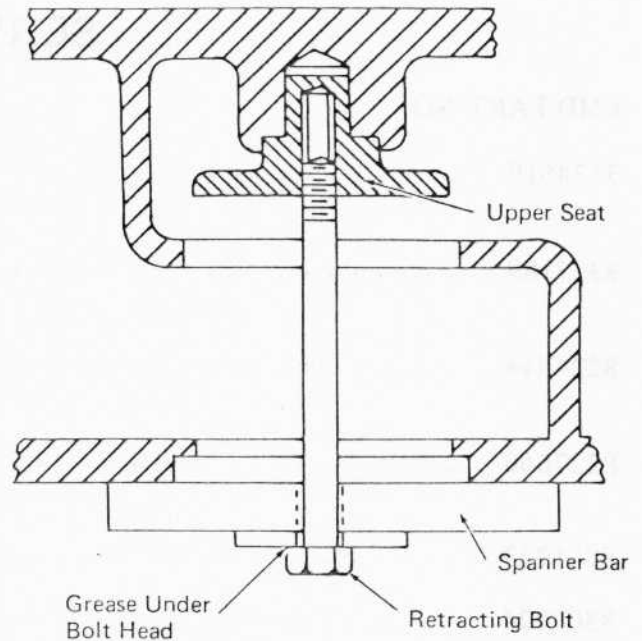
Upper Valve Seat Removal With Retracting Bolt
